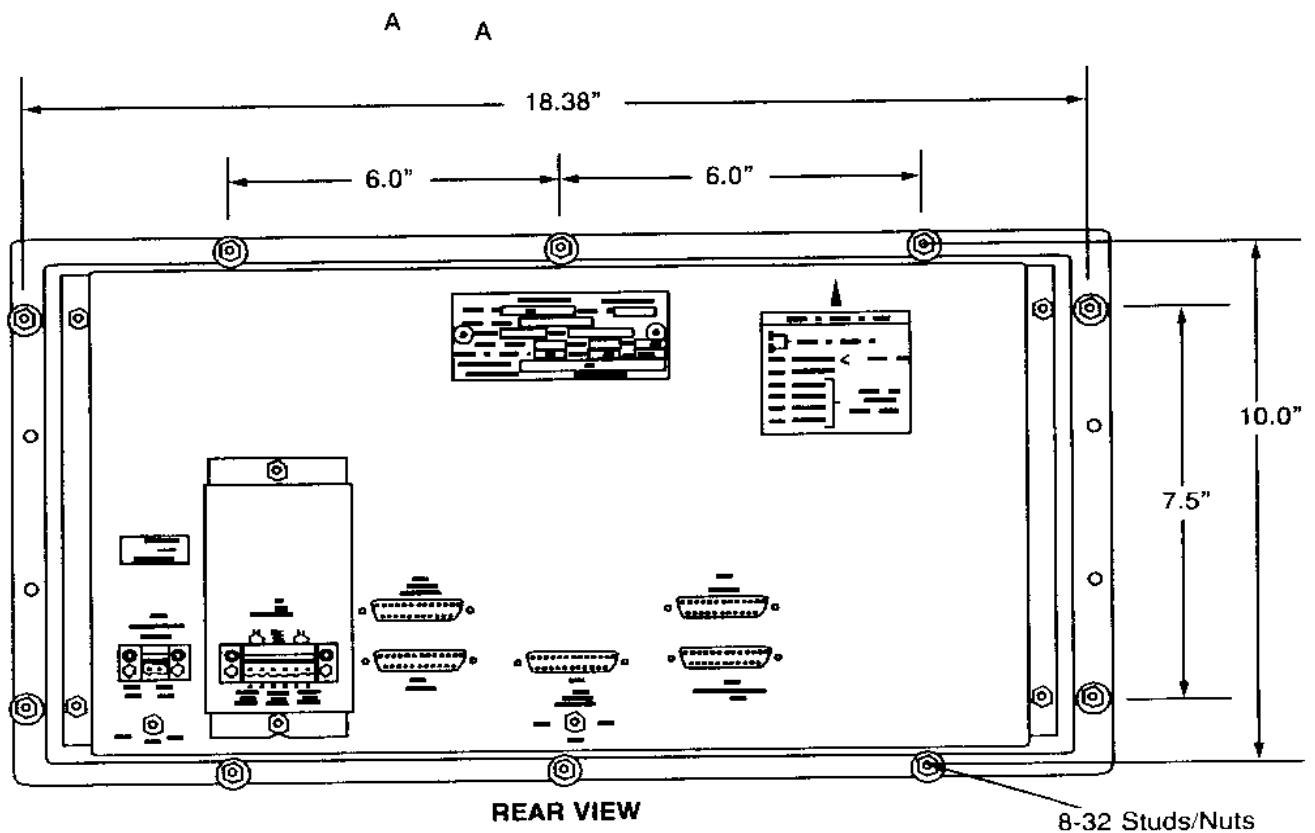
Panel Mount SmartLink Remote I/O PCB
